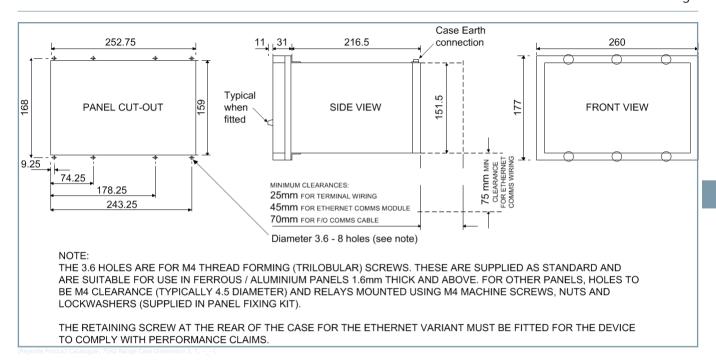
/11 E10 Case overall dimensions and panel drilling details (All dimensions in are mm)
